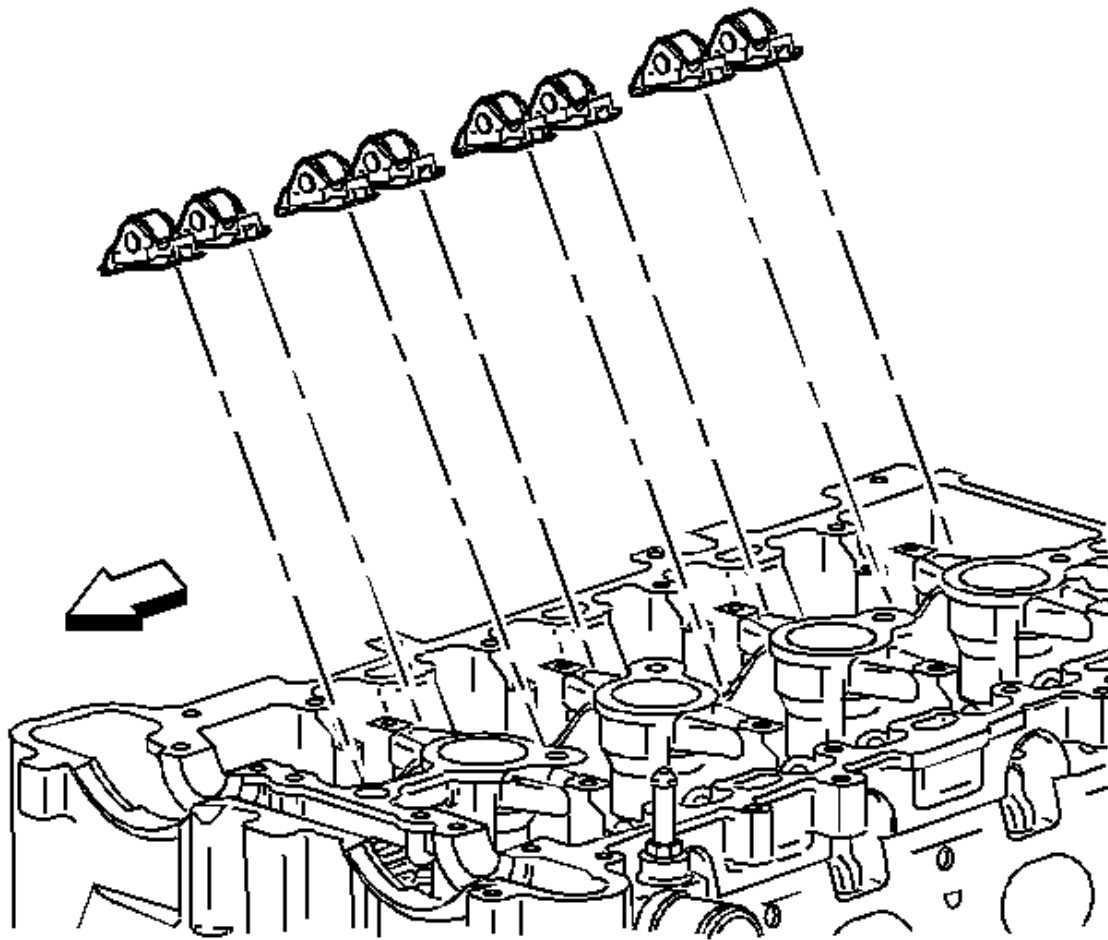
View Of Hydraulic Element Lash Adjusters
